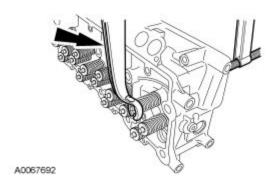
Installing Valve Spring Compressor Courtesy of FORD MOTOR CO.
